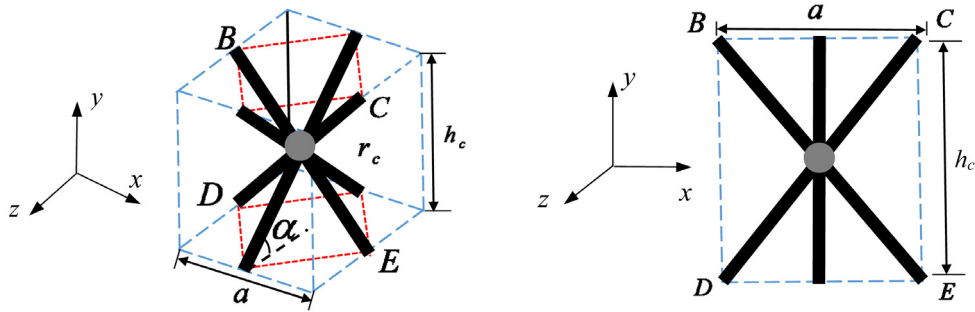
(a) Hourglass lattice truss structure. (b) Front view of the hourglass lattice truss structure.
